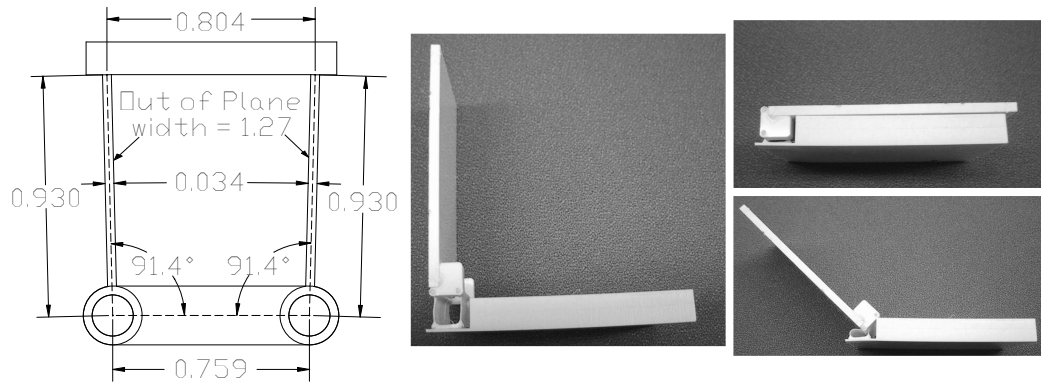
Dimensions (in cm) of the smallest tristable mechanism fabricated by milling polypropylene and photographs of the mechanism in a prototype hinge.
